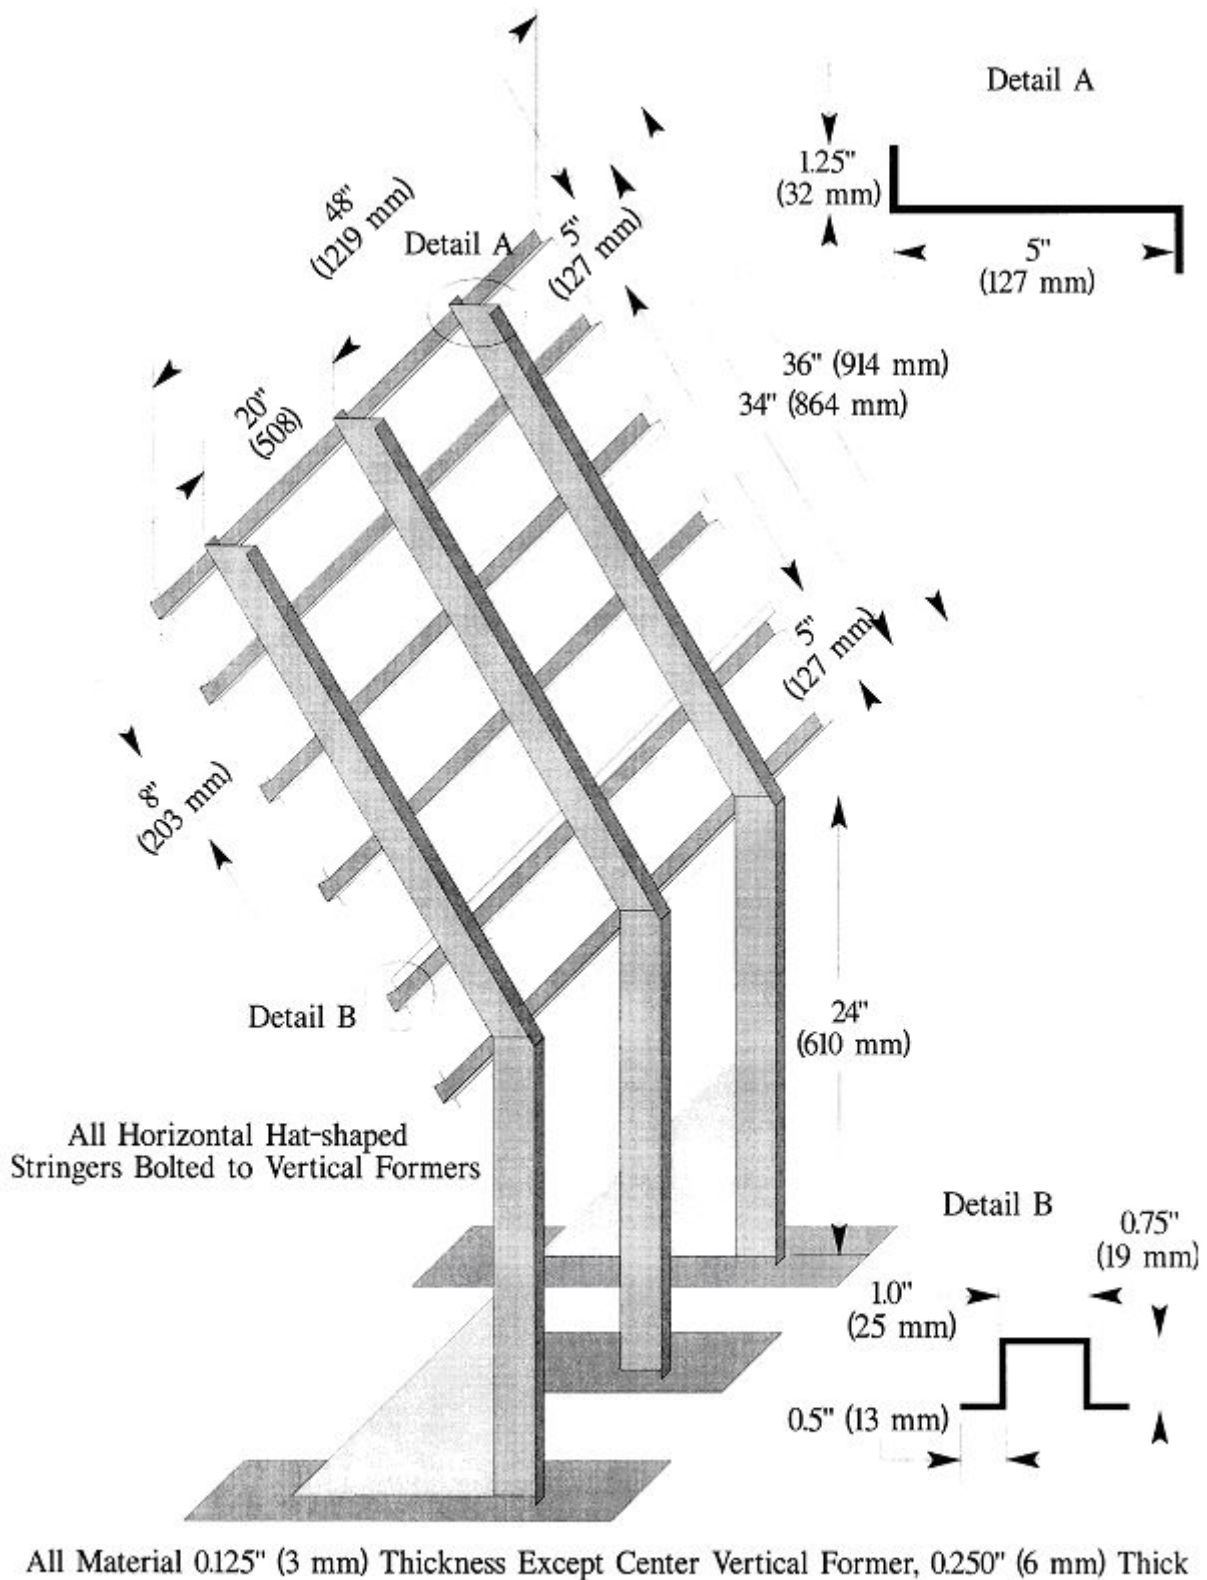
Burnthrough Test Apparatus Specimen Holder
